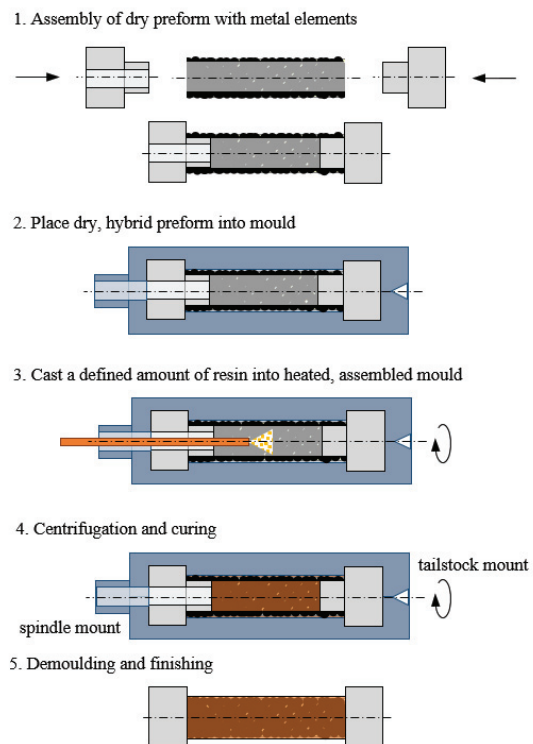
Process chain of centrifugal casting and intrinsic joining for CFRP-metal rotor shafts
